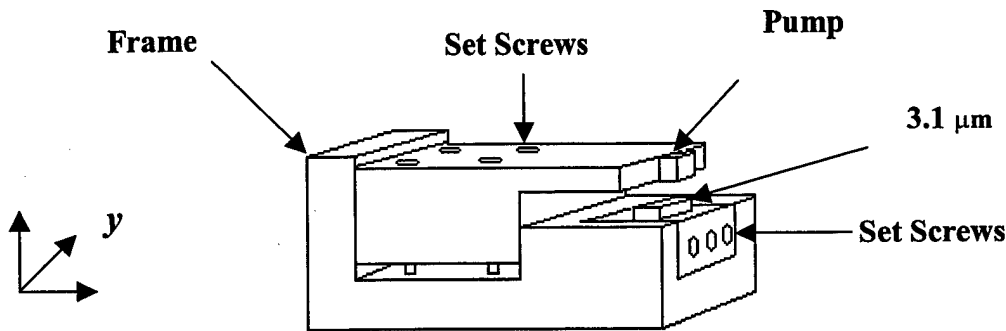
The copper heatsink designed to allow the position of the pump laser to be adjusted relative to the optically pumped laser.
